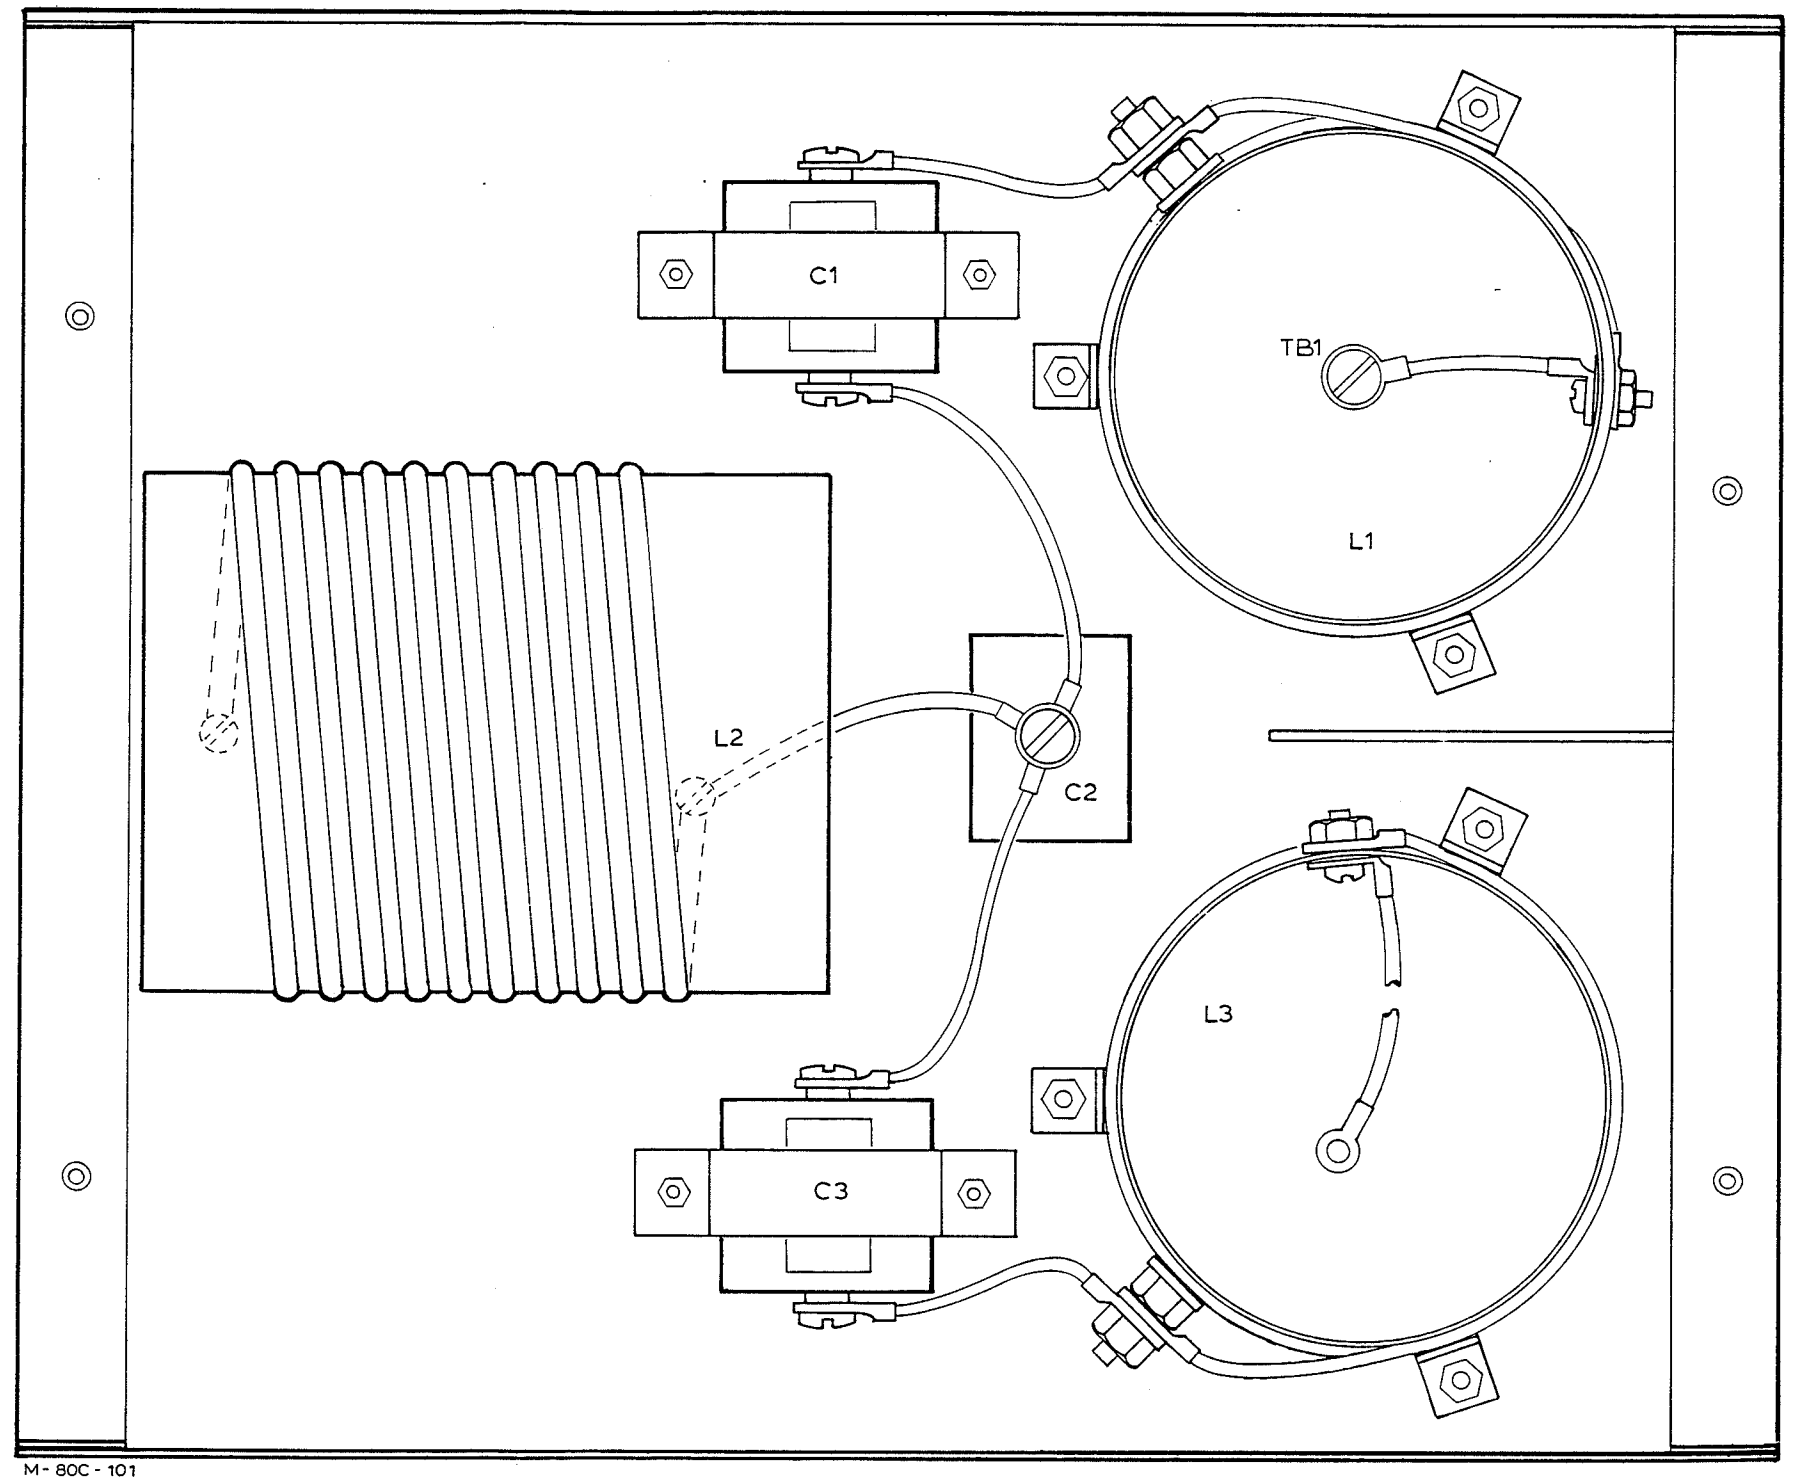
Assembly Detail - NAA13/1 Modulator/Power Amplifier Assembly (Side 2)
